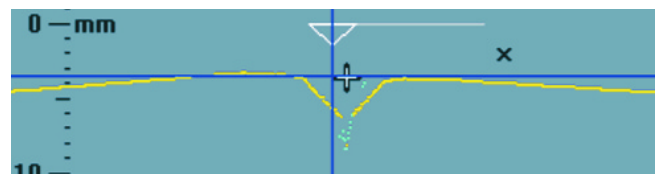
Image processing for automatic detection of the welding path
